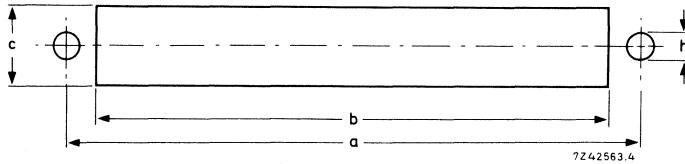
Panel mounting; see Table 3, for dimensions a and b.
